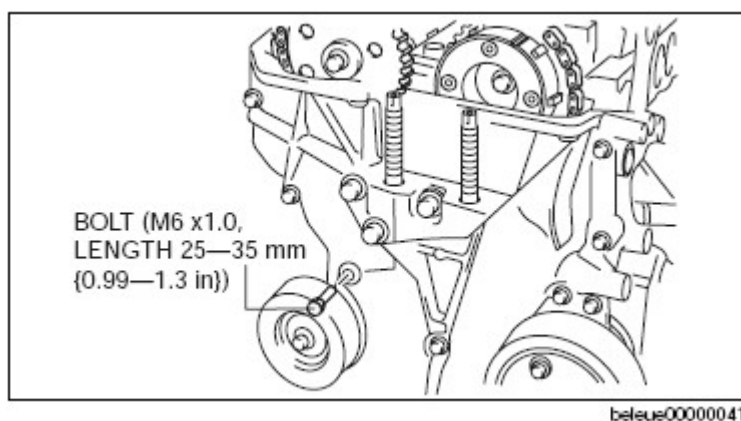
Inserting Suitable Bolt (M6 X 1.0, Length 25-35 mm [0.99-1.3 in]) Into Engine Front Cover Upper Blind Plug
